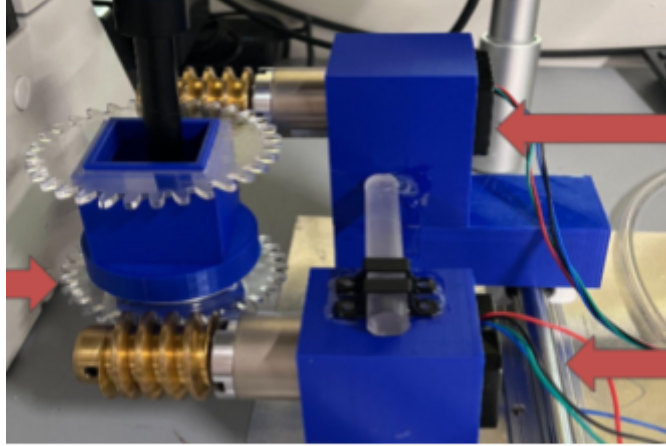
Preliminary Design 1 - Worm Drive Gear System
